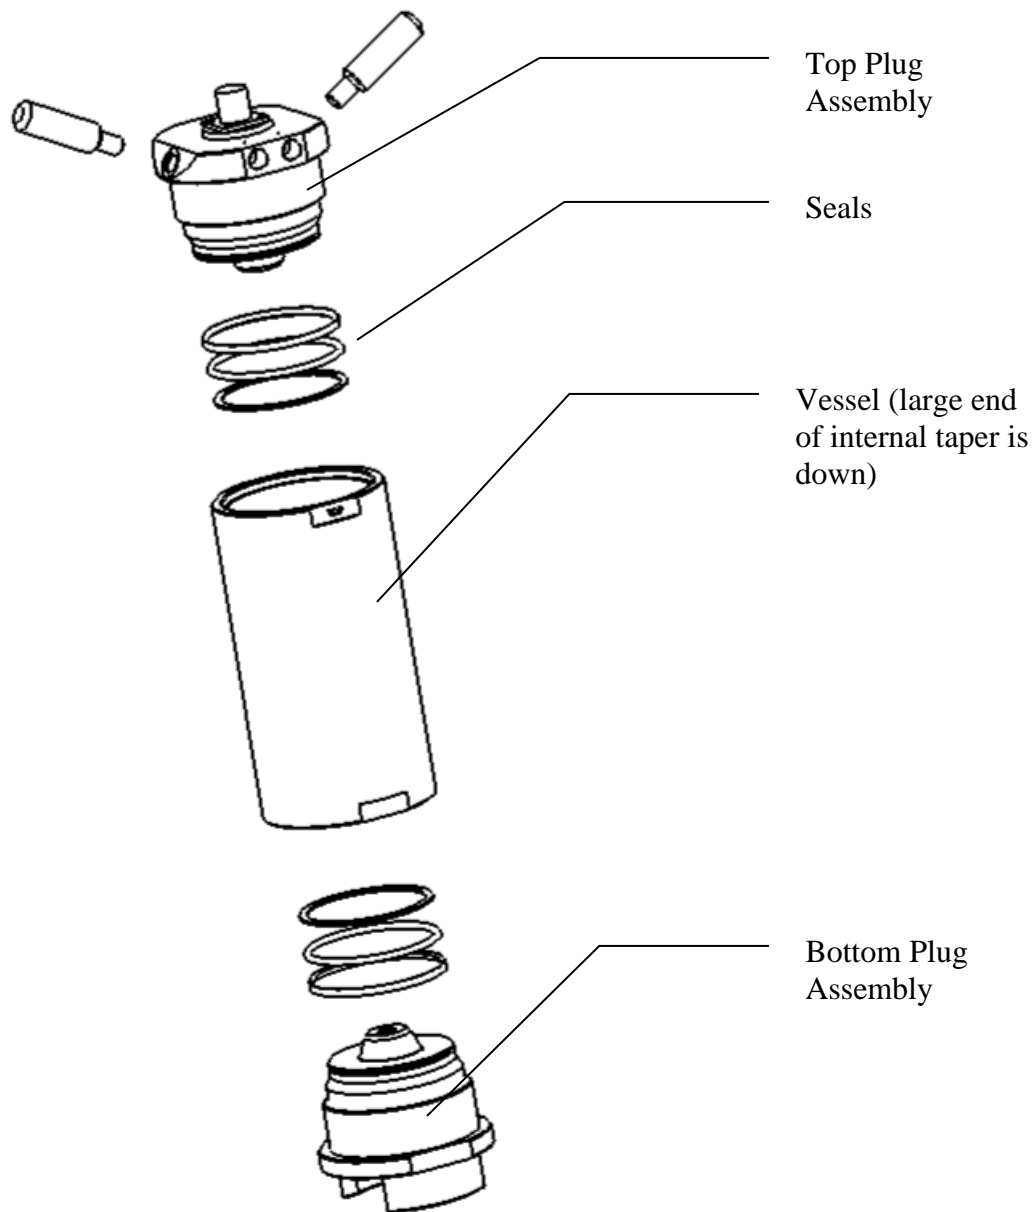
MPRO® Pressure Vessel Exploded Assembly
